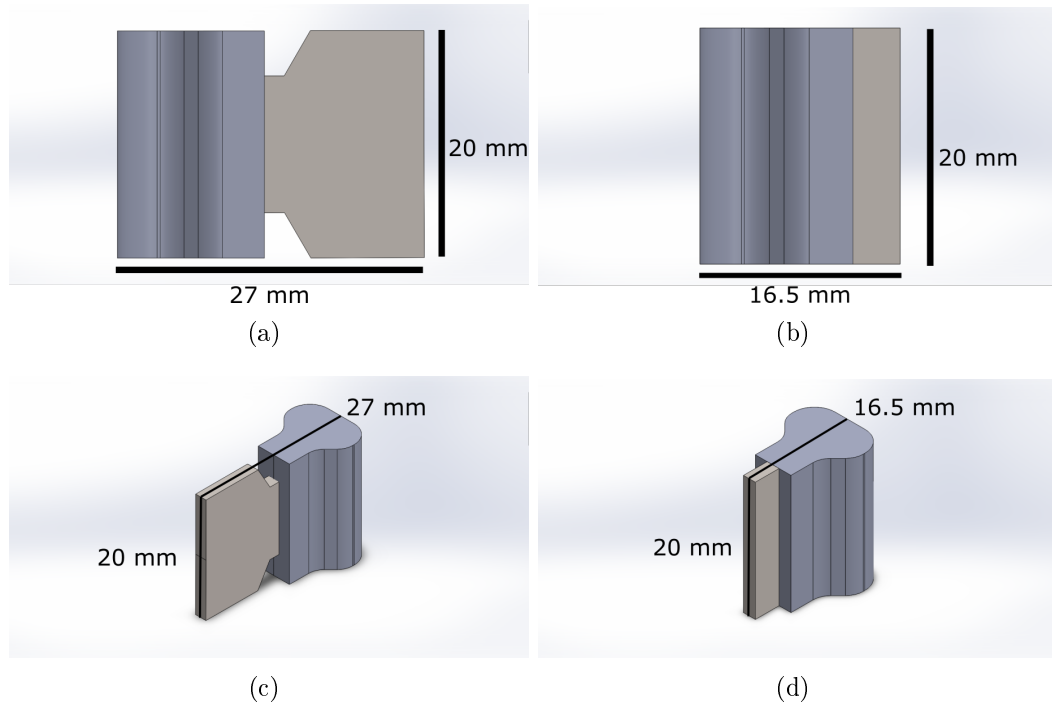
(a) CAD showing the old blade-clamp assembly from the side view, (b) CAD showing the new blade-clamp assembly from the side view, (c) CAD showing the old blade-clamp assembly from the isometric view, (d) CAD showing the new blade-clamp assembly from the isometric view.
